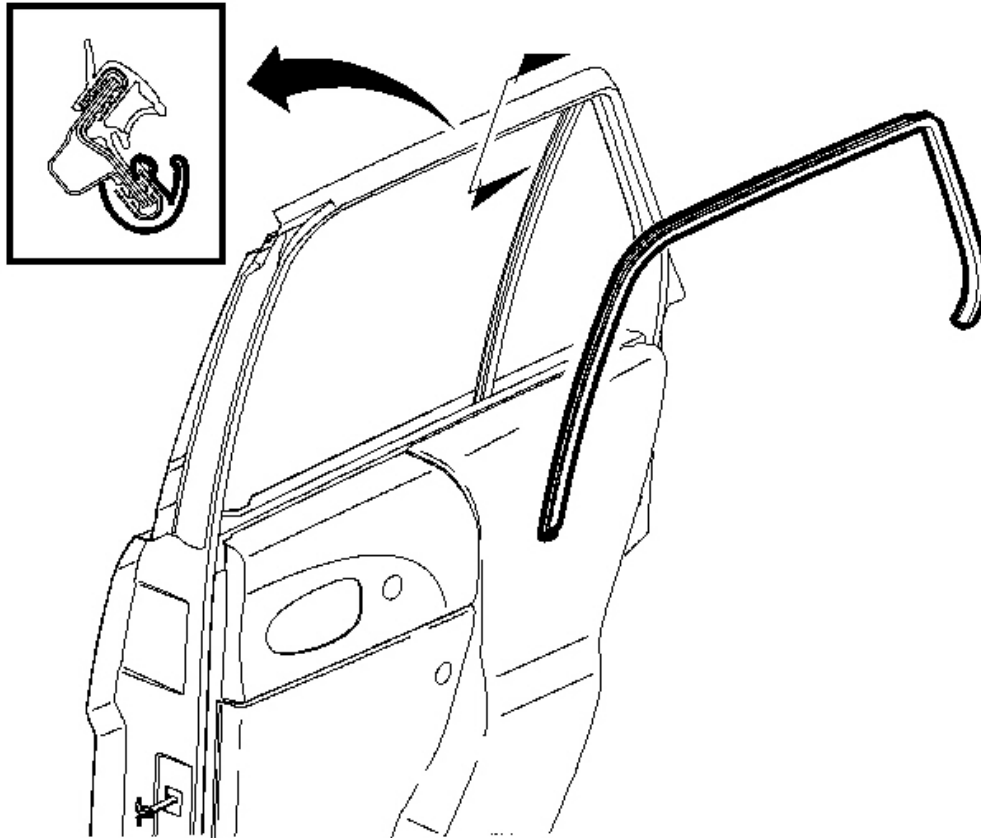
View Of Rear Window Weatherstrip Run Channel Assembly
